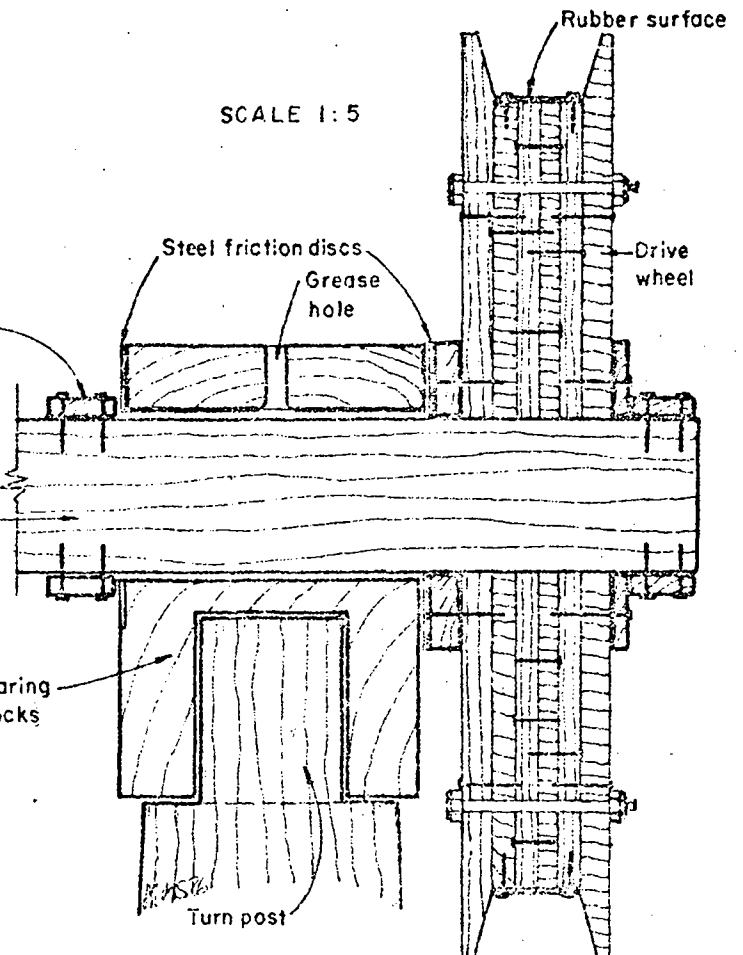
Vertical cross-section through turntable post axis bearing and drive wheel
